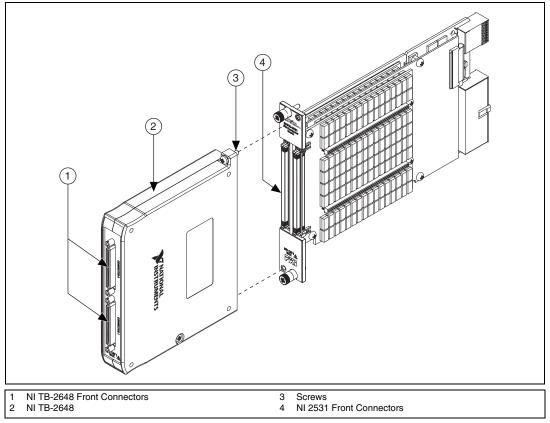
Installing the NI TB-2648/2649/2650/2651 Terminal Block
